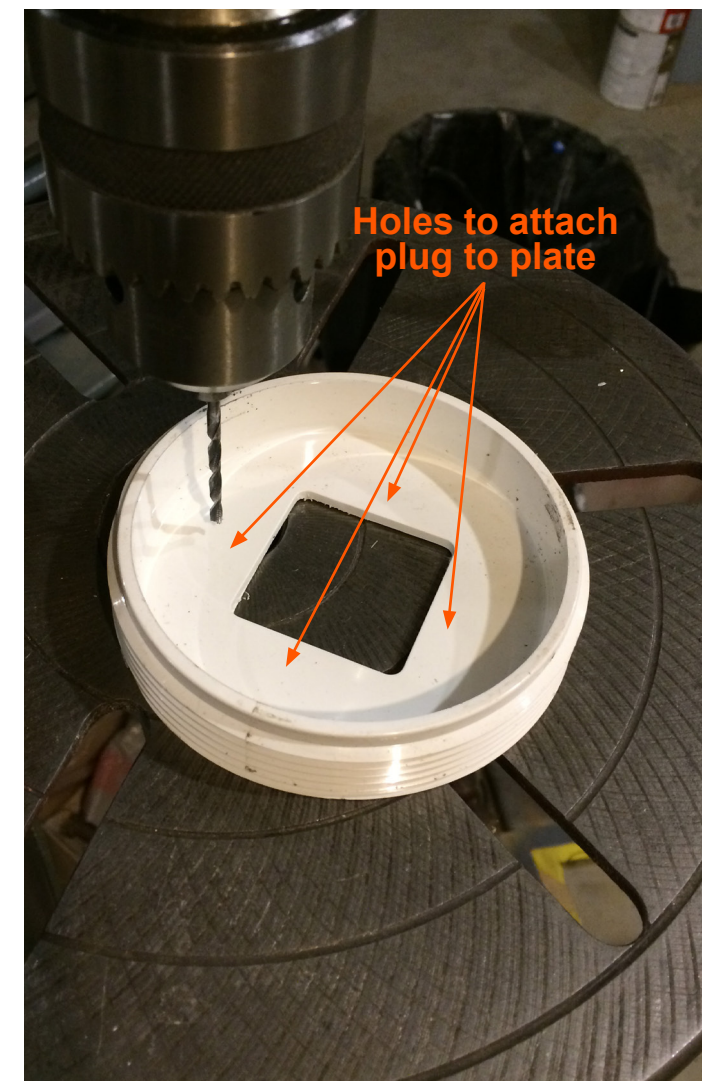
Drill 4 holes (use #25 bit) centered on each side of the square opening.
